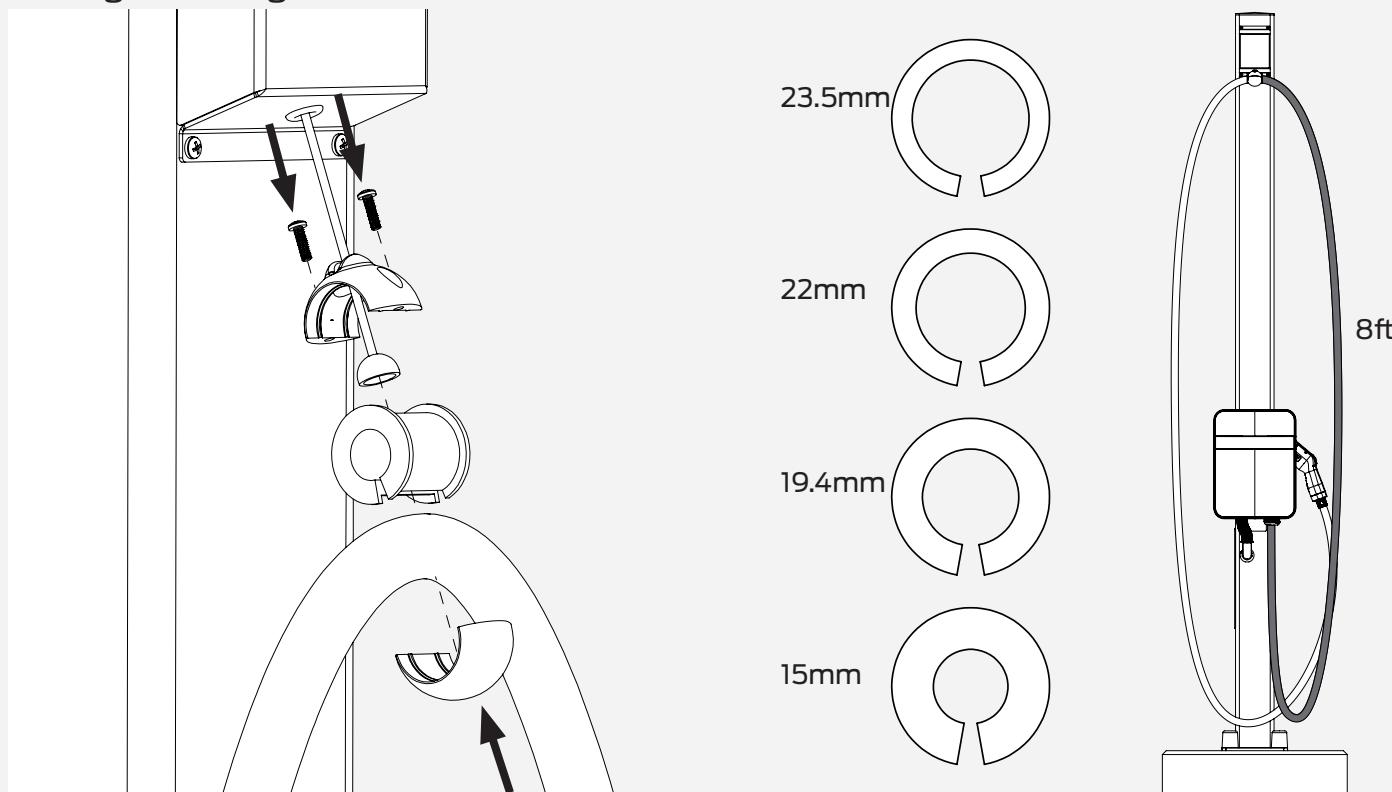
Install Retractor Cable Clamp (For 8ft Pedestal Only)
